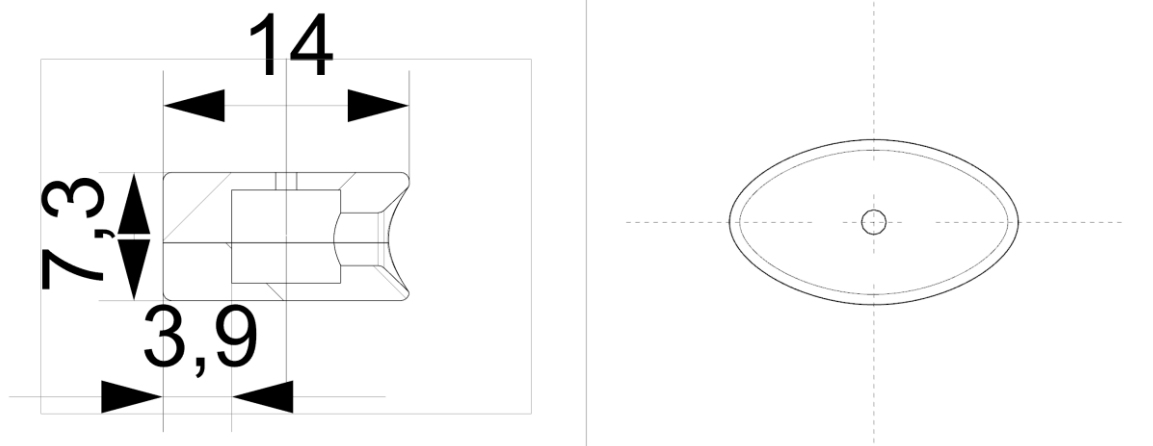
Idea shell 2 section view (left) and top view (right) (own drawing)
